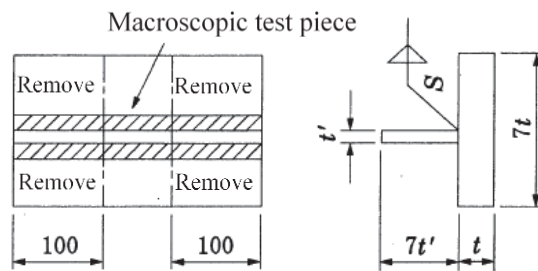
Fillet Welding Test (Macroscopic Test) Welding Method and Shape of Test Piece
